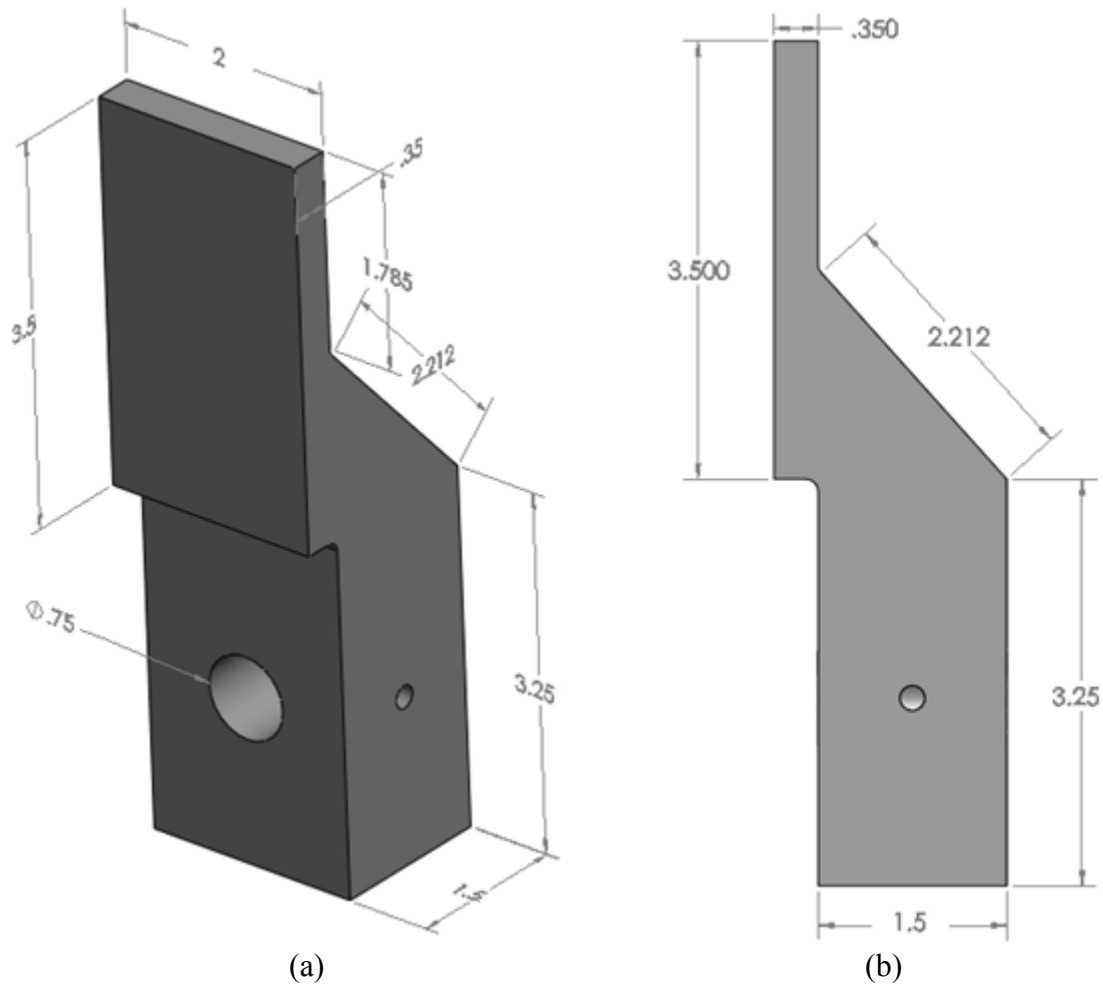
3D CAD model of fixture (left) and CAD side view of fixture (right)
